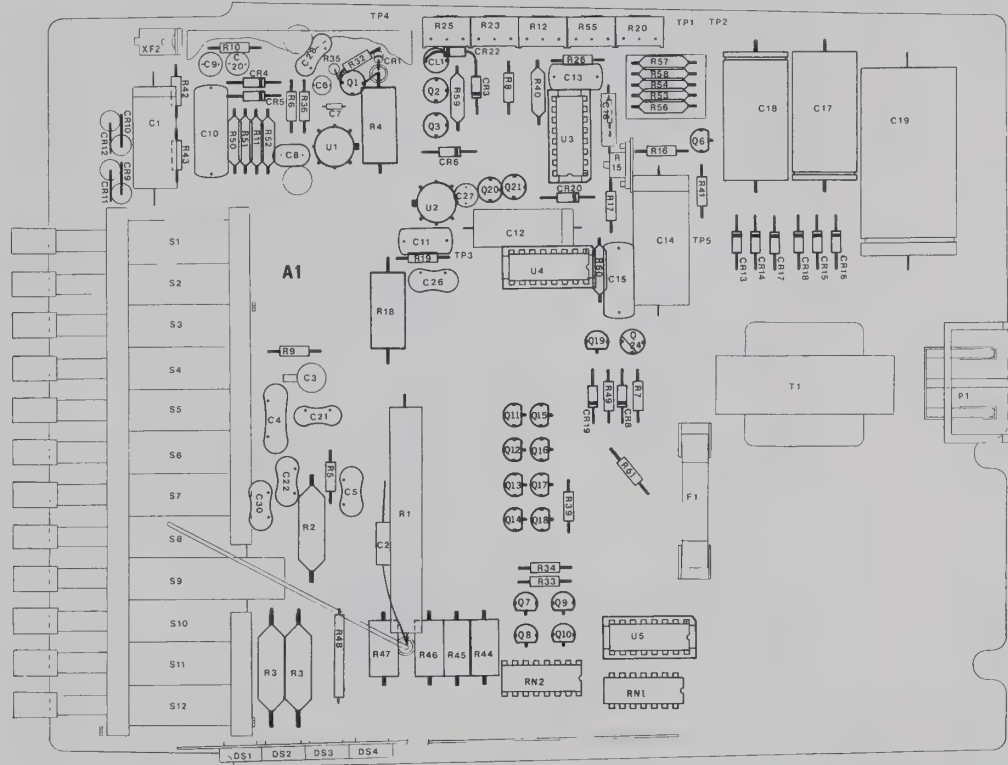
8000A MAIN PCB ASSEMBLY
